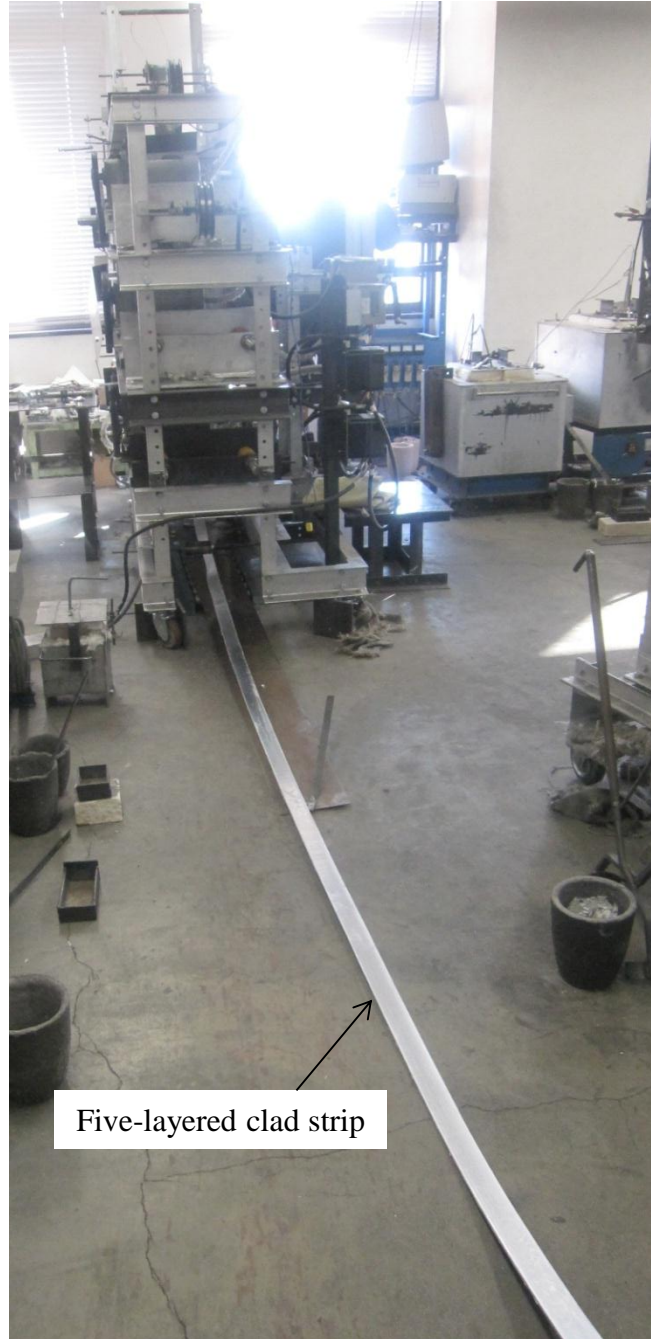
Appearance of the five-layered clad strip fabricated by using the vertical-type high-speed tandem twin-roll caster.
